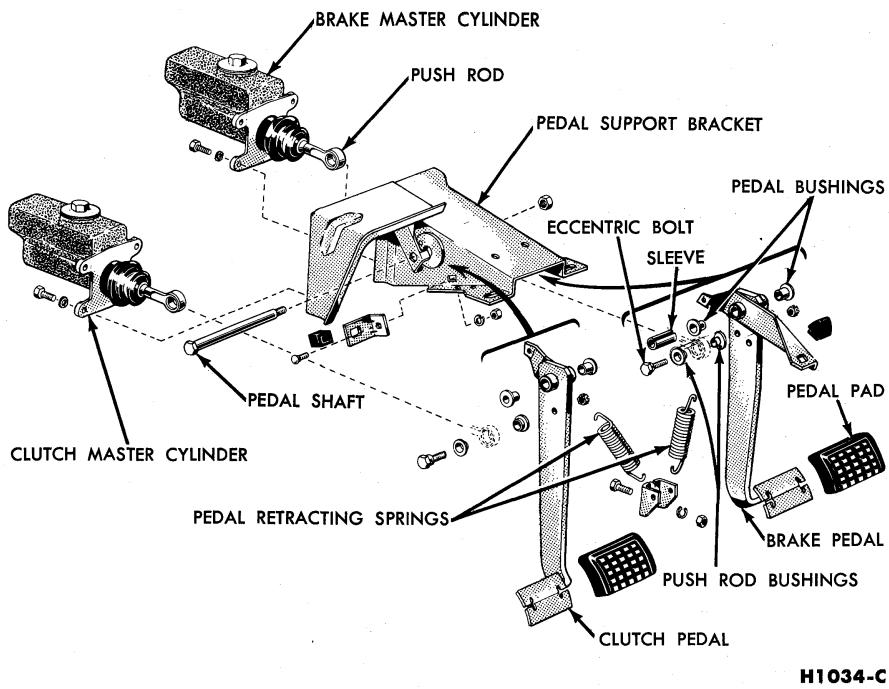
B-, F-, N-, or T-Series and P-100 Brake Pedal and Related Parts
